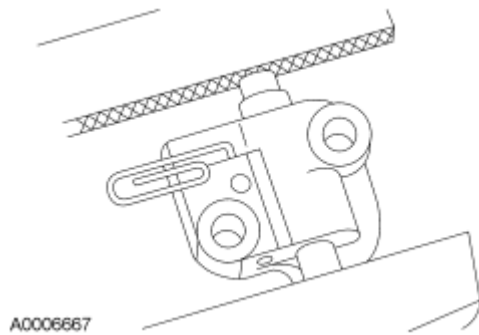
Retaining Tensioner Piston With 1.5-mm (0.06-in) Wire Or Paper Clip
